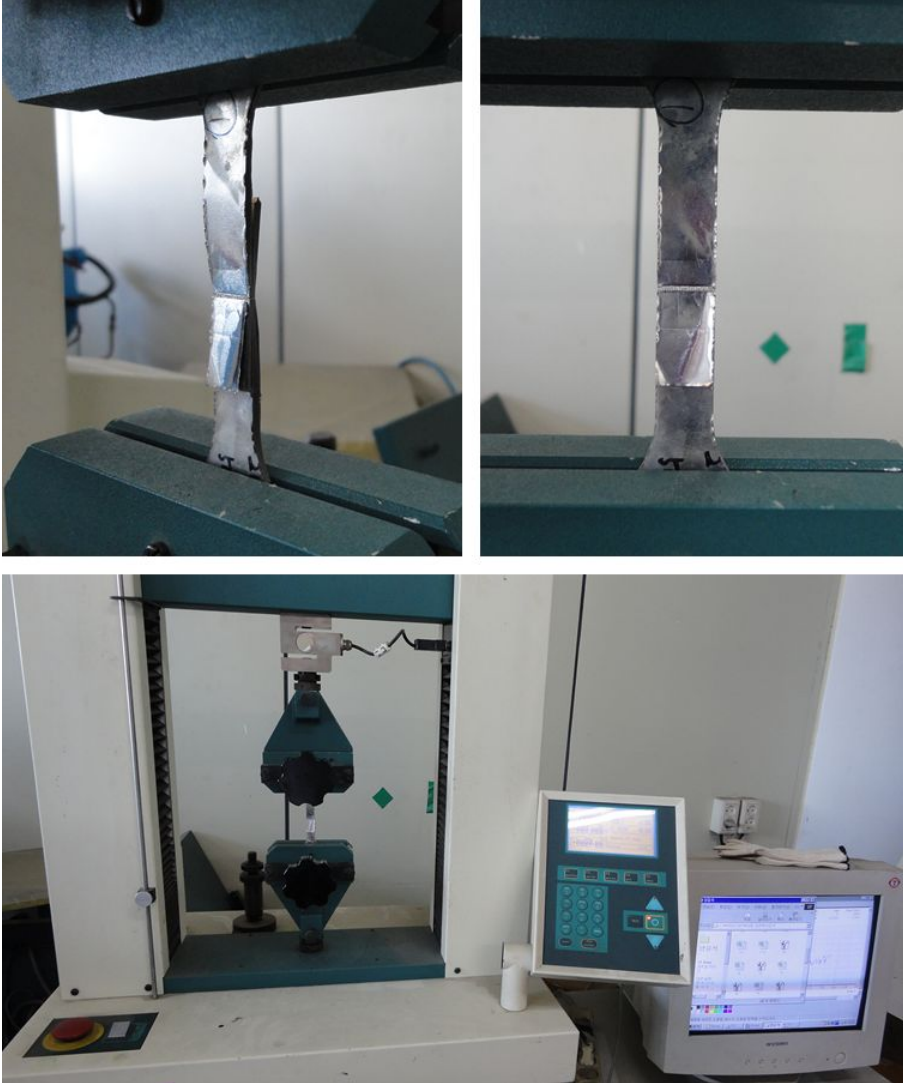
tensile test experiment equipment of lap welding
